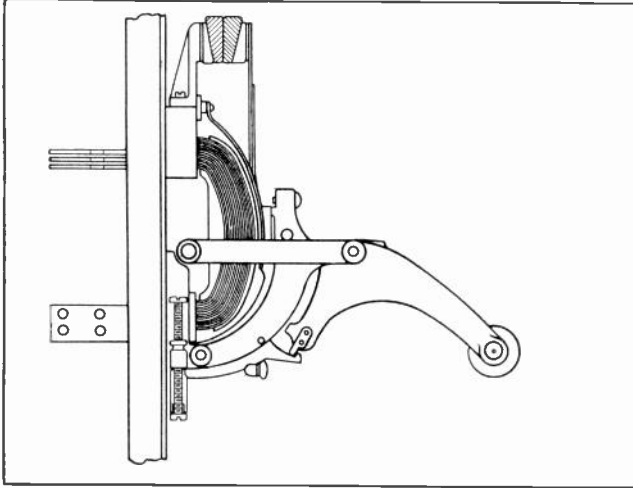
This sketch shows a side-view of a circuit breaker in closed position and illustrates the copper "leaf" construction of the main contact. Note the copper stubs which project through the board for connections to bus bars.
